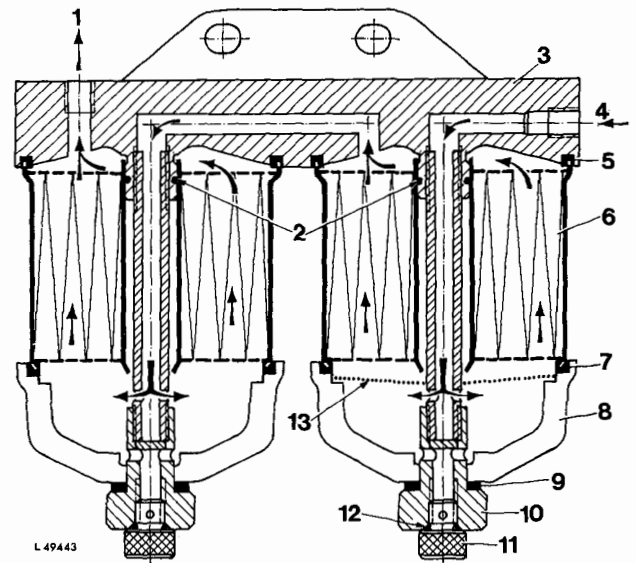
ROTO-DIESEL Dual Stage Fuel Filter - Sectional View
